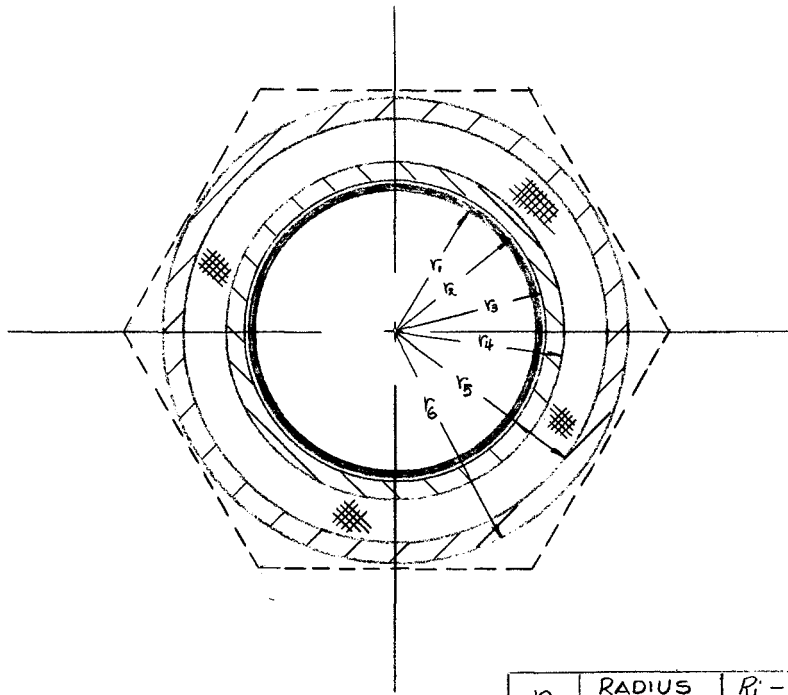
PROPOSED DESIGN OF HEAT PIPES
